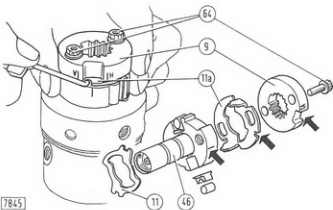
Reassembling Maximum Fuel Adjustment Device
